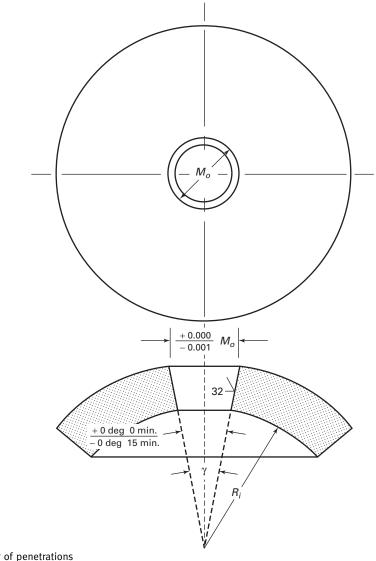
Dimensional Tolerances for Penetrations in Acrylic Windows
